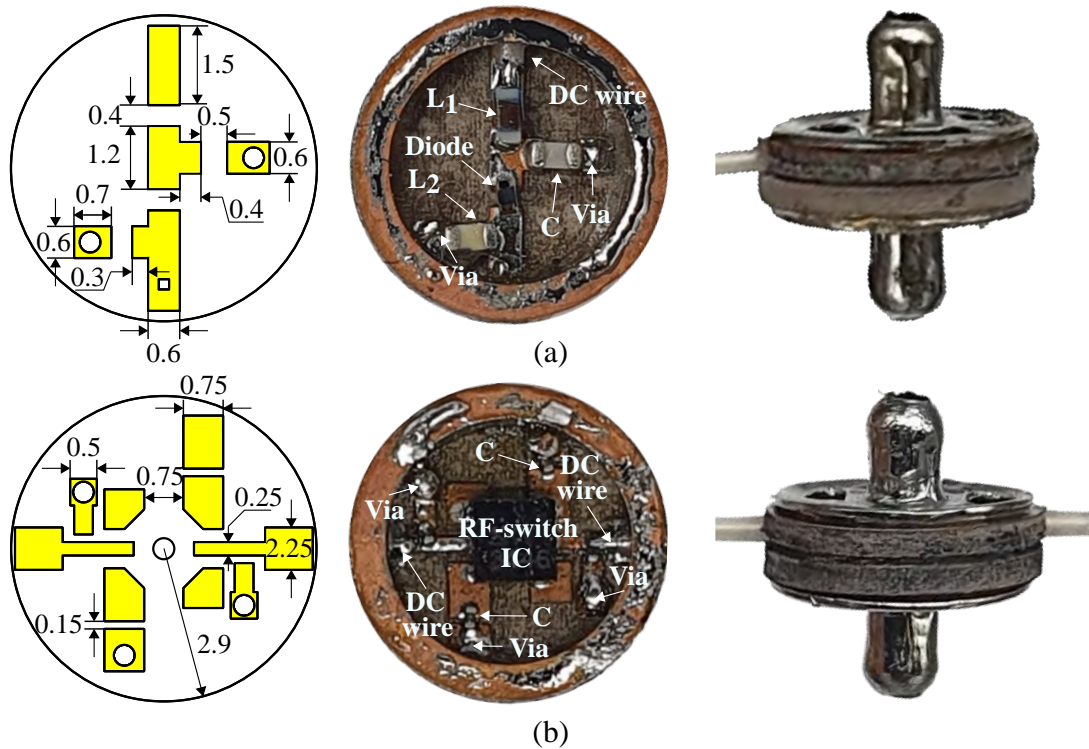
Reconfiguration module prototypes. PCB layout with dimensions (mm), zoomed-in reconfiguration module prototypes with lumped components soldered, and assembled reconfiguration modules for (a) PIN diode and (b) RF-switch IC.
